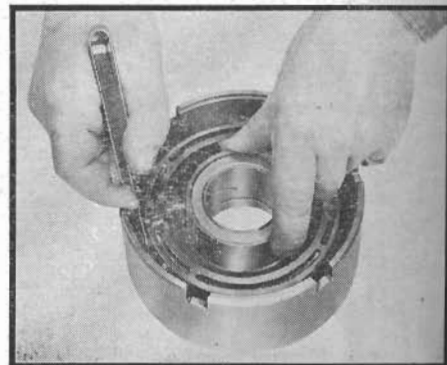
Checking seating of clutch piston outer seal. 1953-59
